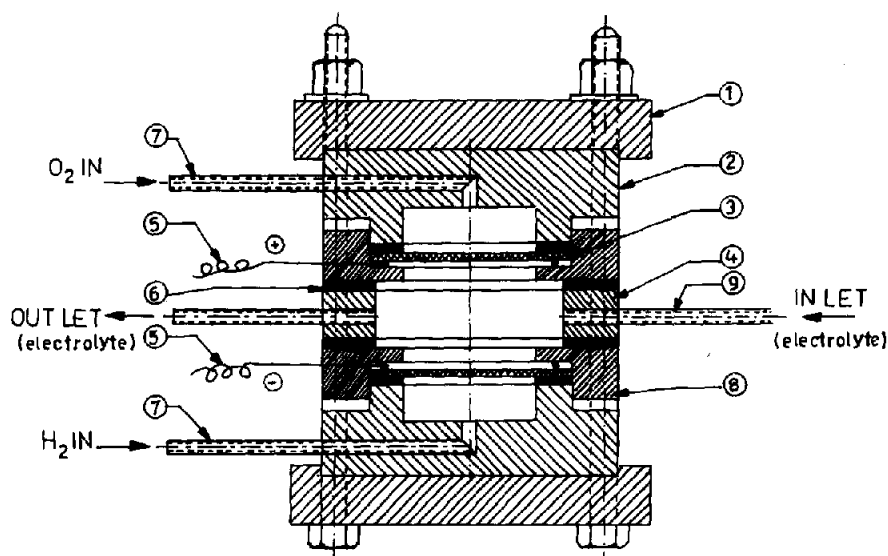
The fuel-cell assembly: (1) cover plate; (2) gas chamber assembly; (3) electrode; (4) electrolyte chamber; (5) terminal wire; (6) gasket; (7) gas inlet tube; (8) electrode holder and (9) electrolyte tube.
